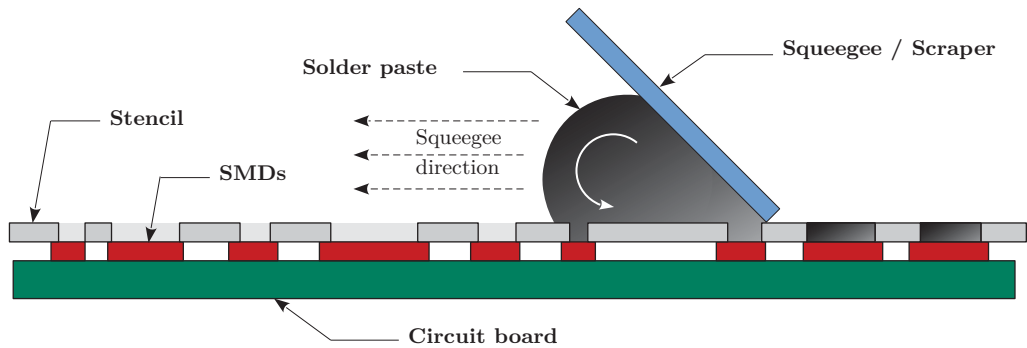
Application of solder paste to a printed circuit board through a stencil (Heß et al., 2025)
